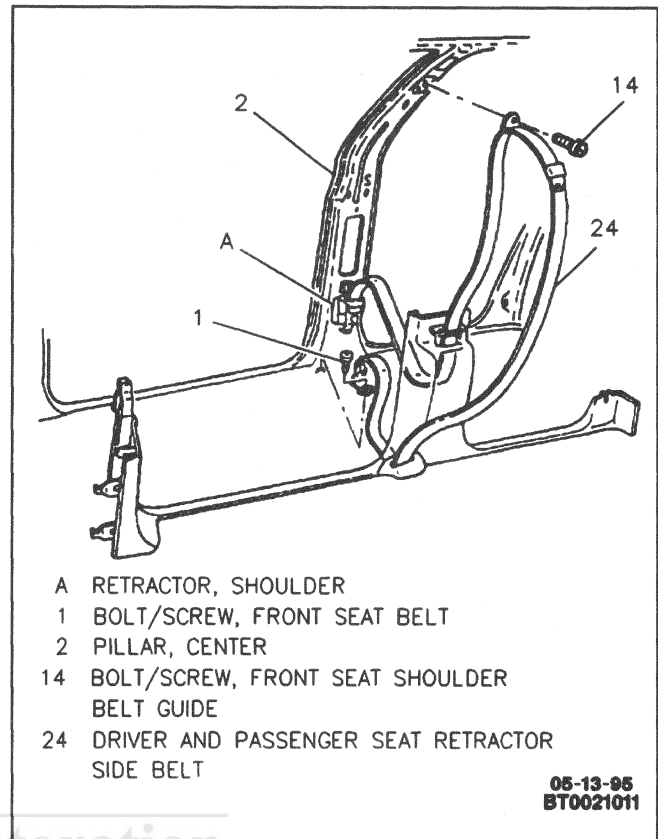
Driver and Passenger Seat Retractor Side Belts (Sedan)
